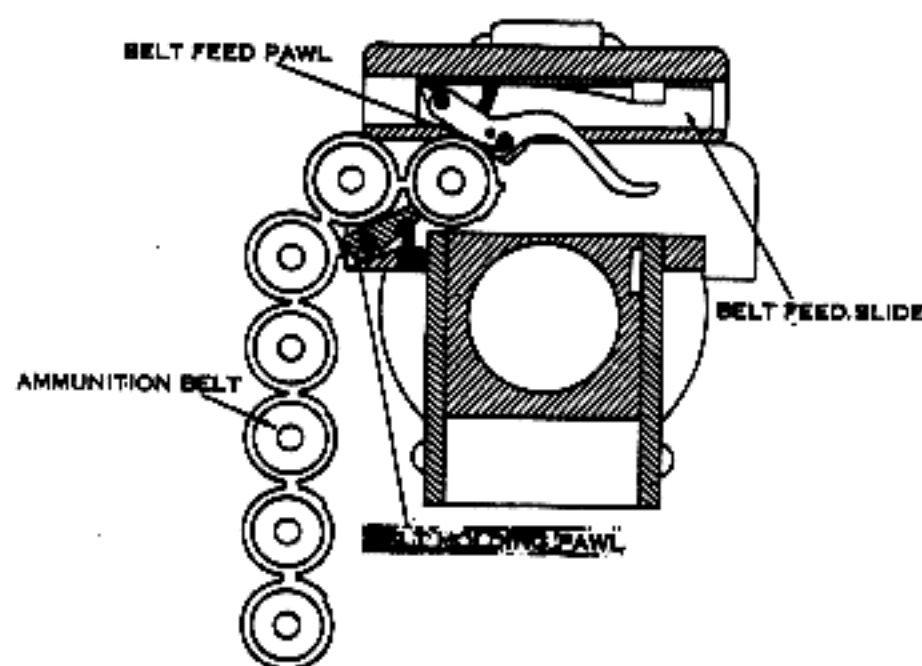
Feeding—bolt fully forward, belt feed slide in the cover and ammunition belt held in the feedway by the belt holding pawl (rear view).
